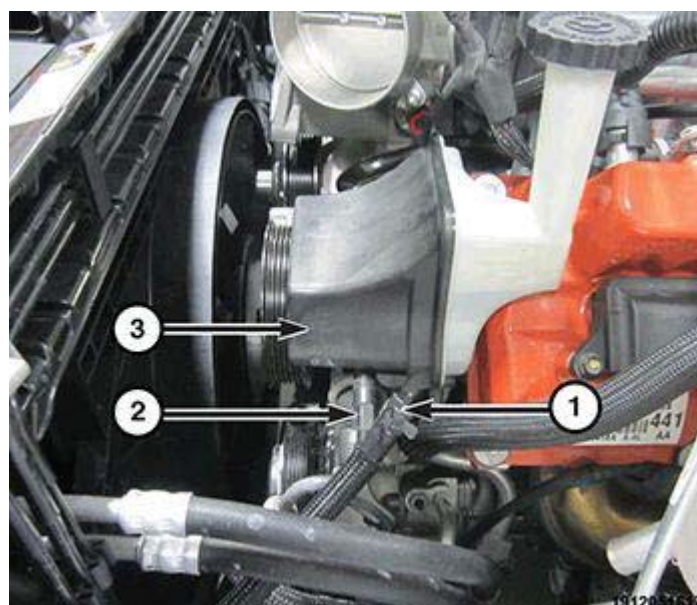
Supply Hose, Pressure Hose & Power Steering Pump
